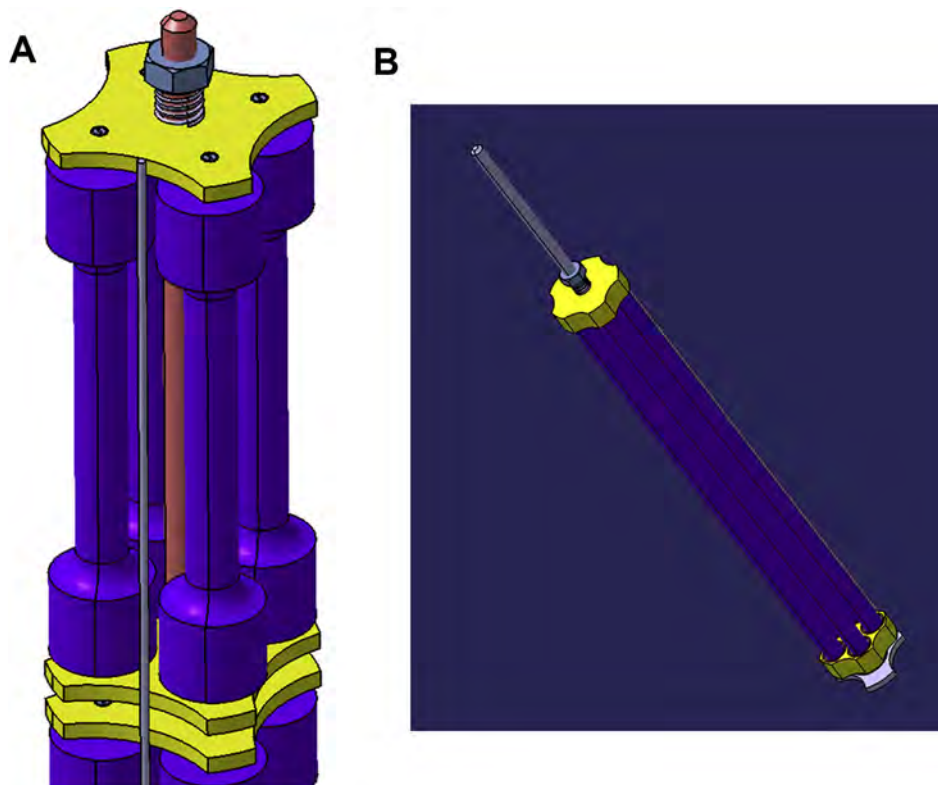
Design of the sample holder: A – for tensile samples, B – for ceramic cylindrical samples.
